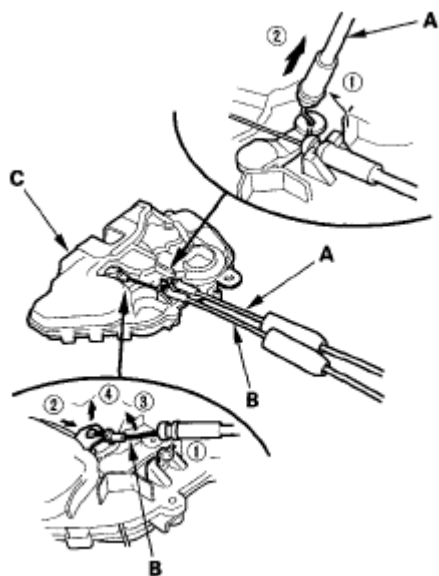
Detaching Latch Cable And Inner Handle Cable
